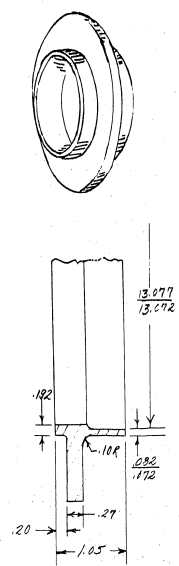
P/N 226956 - Front Flange, Rear main bearing vapor Duct Assembly, Material Ti-A-70
